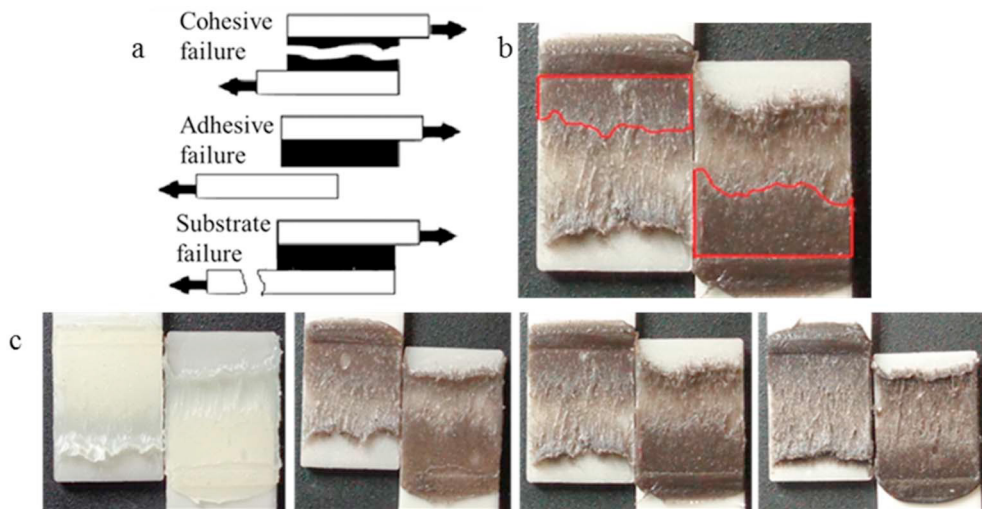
(a) Representations of SLJ failure modes; (b) fracture surface of HMA\_5%; (c) representative fracture surfaces of HMA, HMA\_3%, HMA\_5% and HMA\_10%.
